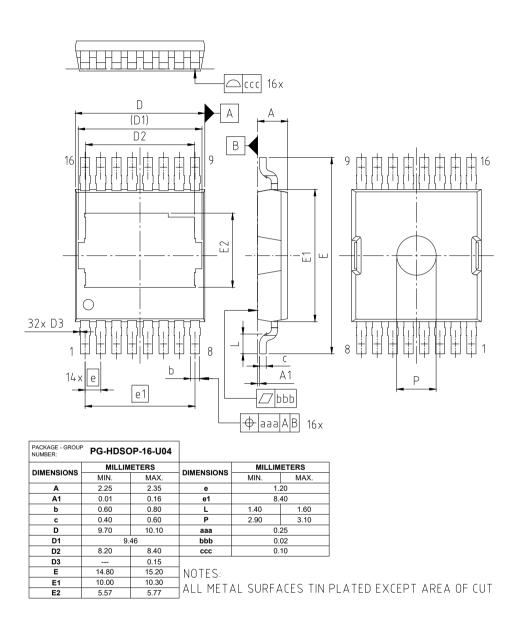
Outline PG-HDSOP-16, dimensions in mm
